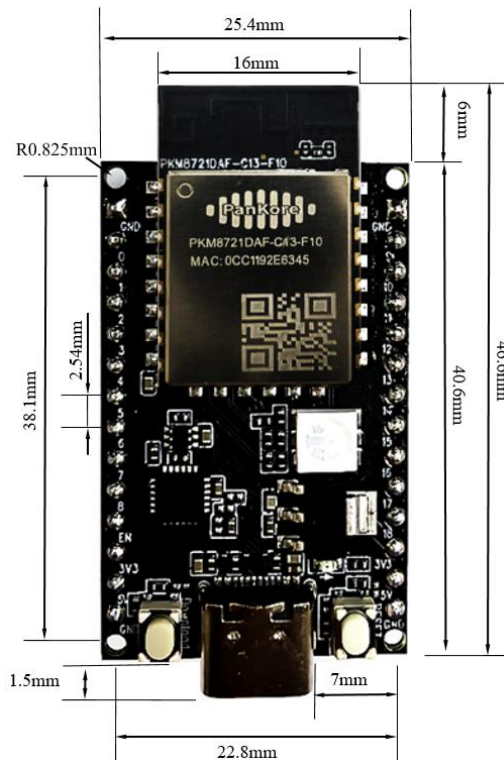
PKE8721DAF-C13-F10 Board Dimensions
